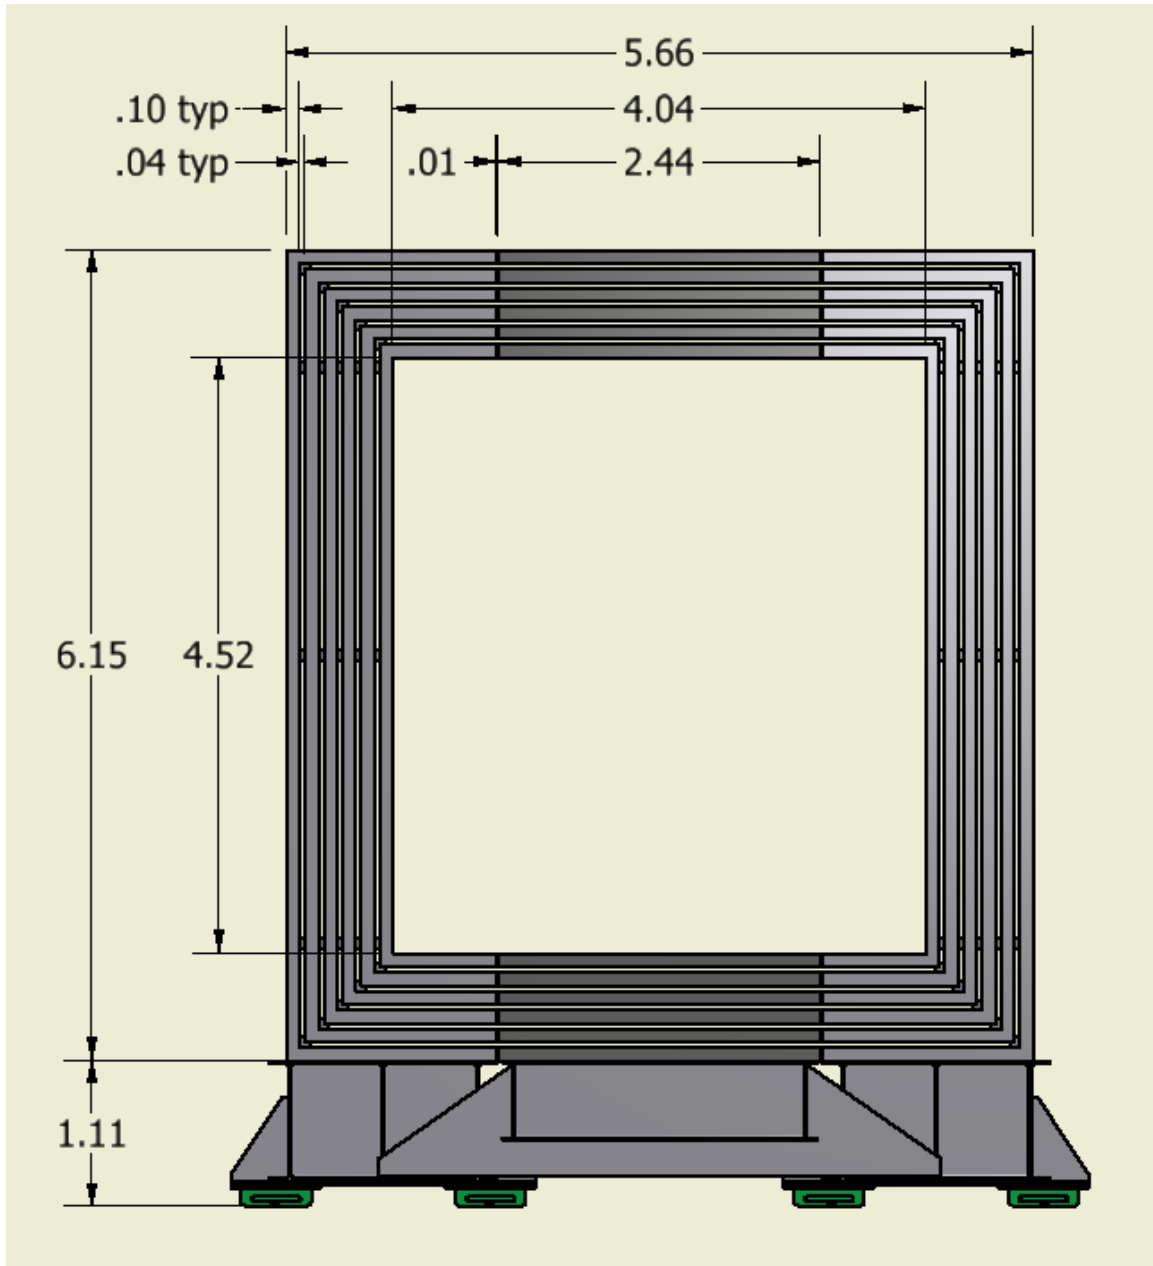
The LArTPCT magnet's yoke made up of six pairs of C-shaped component yokes; dimensions are shown in meters
